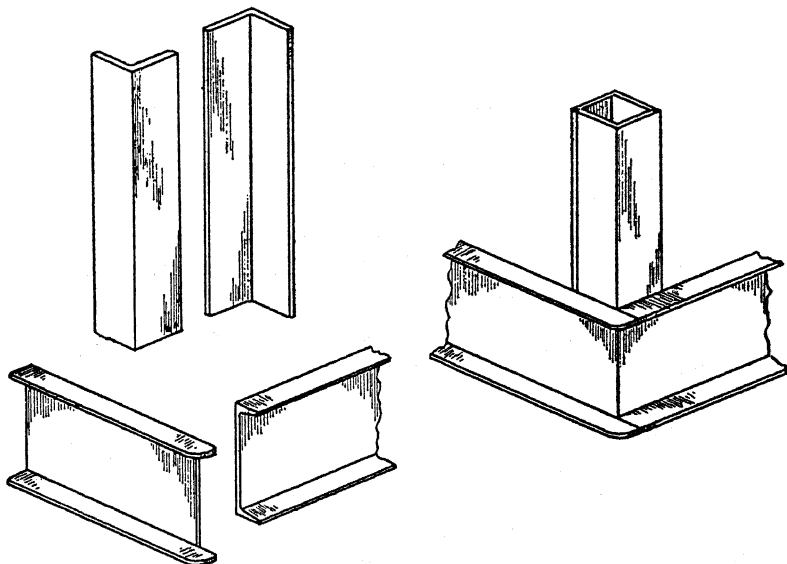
Using angles and channels a corner design can be made to give an extremely stiff construction for vertical load.
